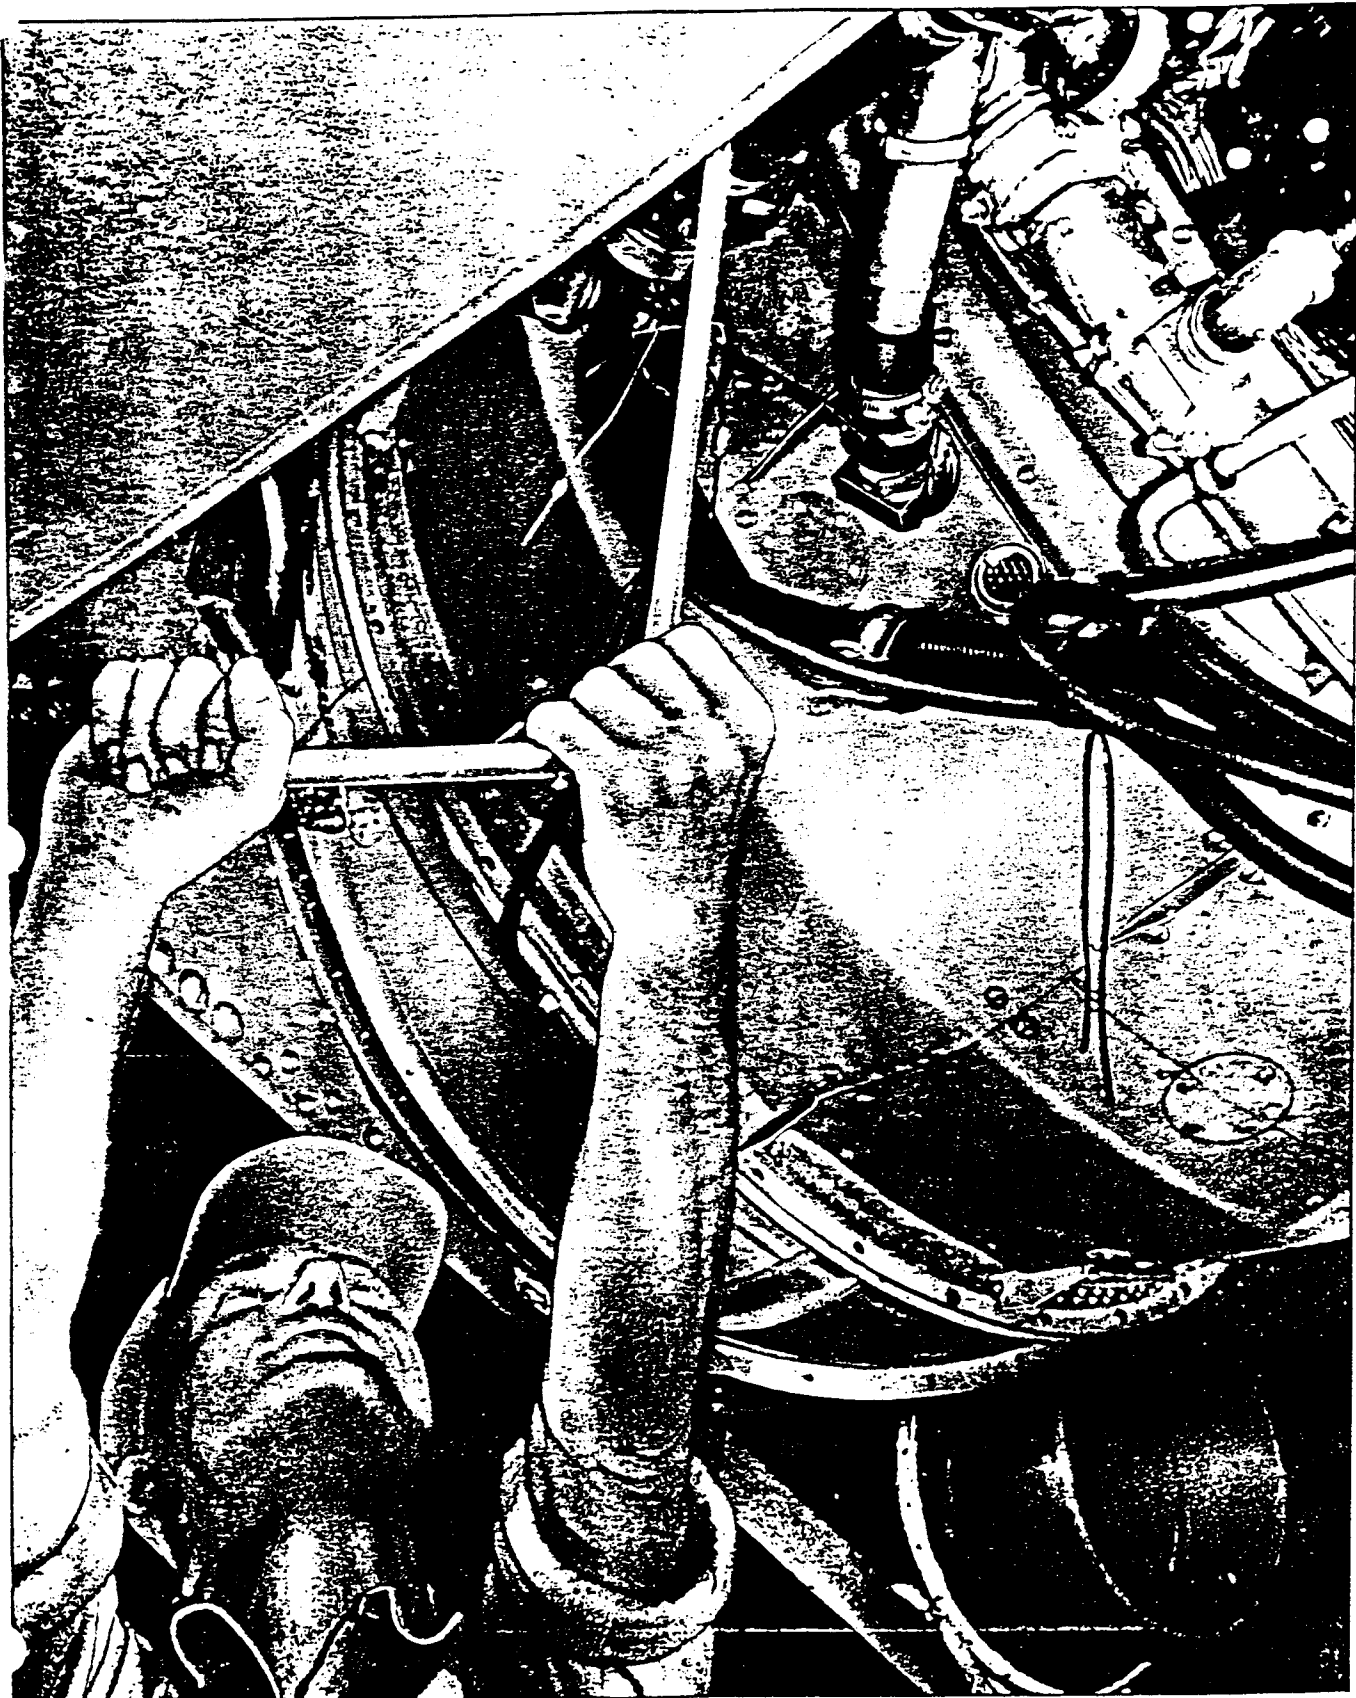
Tightening Engine Assembly Mount Bolts - Typical
